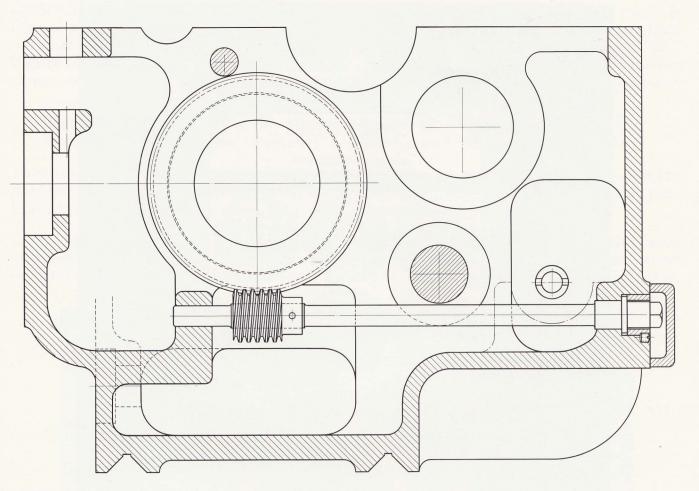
Diagram showing means for adjusting Spindle Bearings
